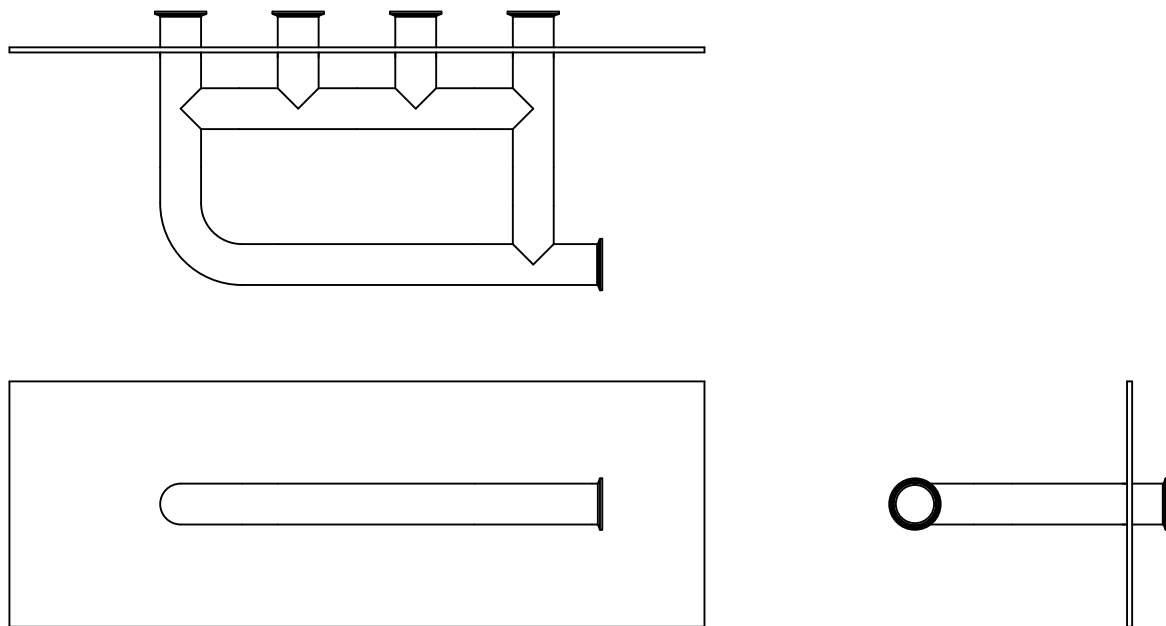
Double Tubesheet Heat Exchanger Bonnet Design
